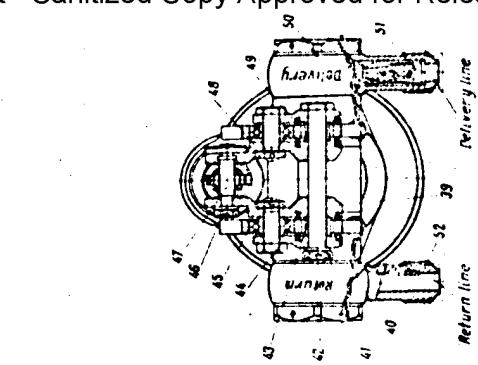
Hydraulic Booster 67-14N. Assembly Drawing (for references, except ref. 15, see fig. 30)
